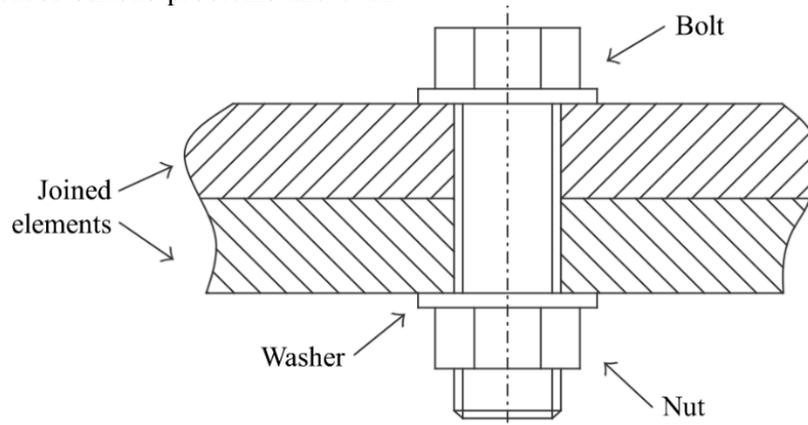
Bolted joint (Cıvatalı bağlantı) [1]
